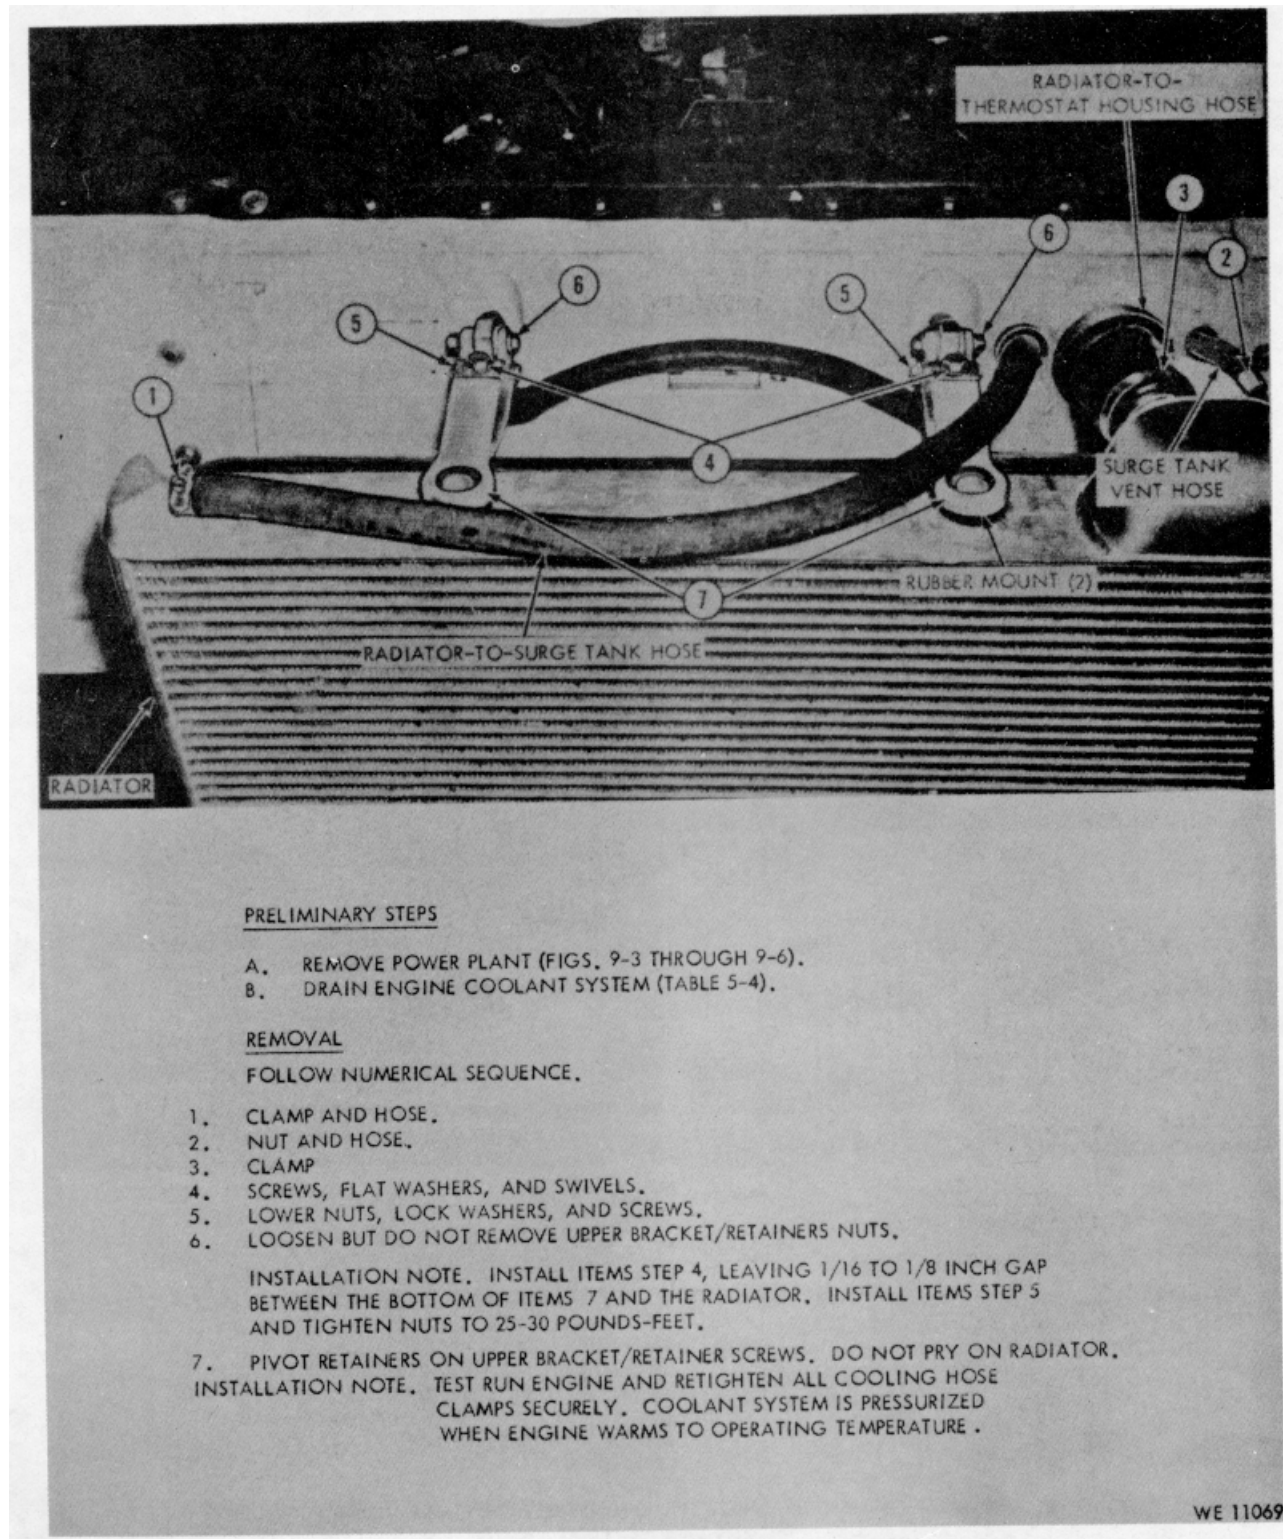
Removal/installation - engine coolant radiator (1 of 2)
